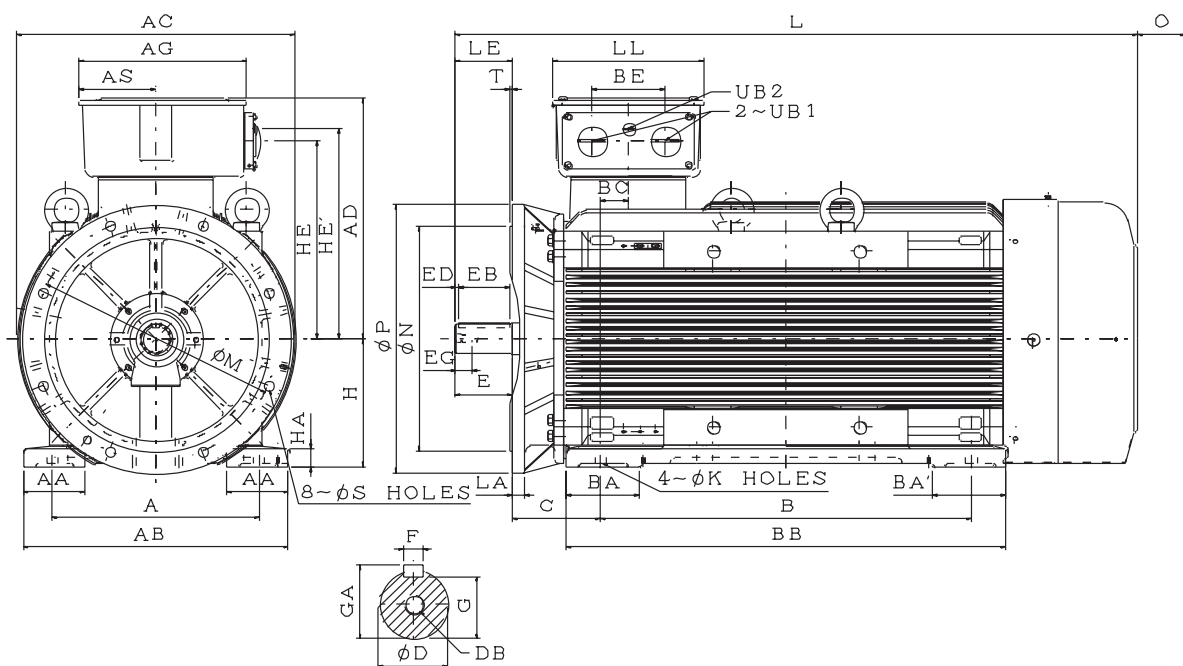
Outline drawing of cast iron design, feet version, mounting B35; frame size 315DA - 315DC
